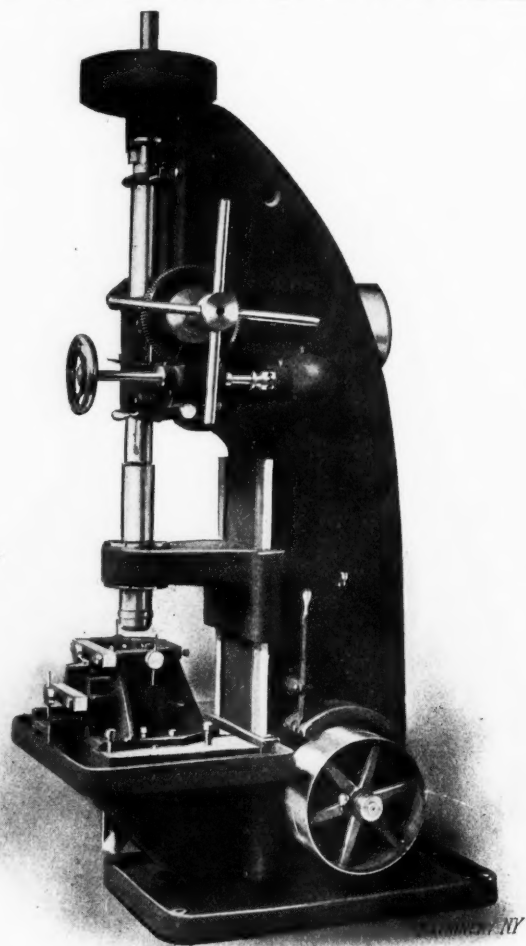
Side View, showing Single Pulley Drive, Boring Bar Support, etc. be carried by each spindle, thus materially increasing the capacity of the machine.
